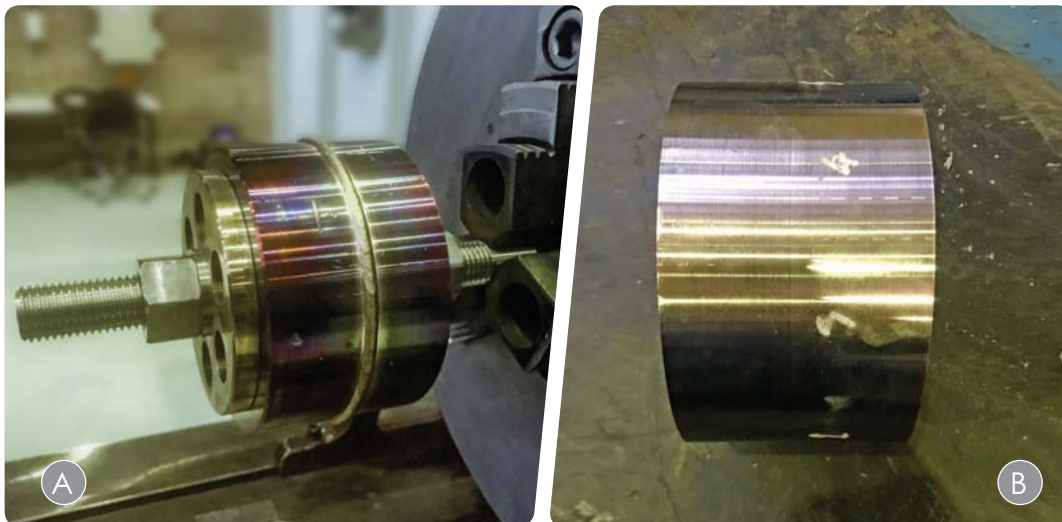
Welded seamed pipe sample following completion of the welding (a) and PWHT (b) processes
